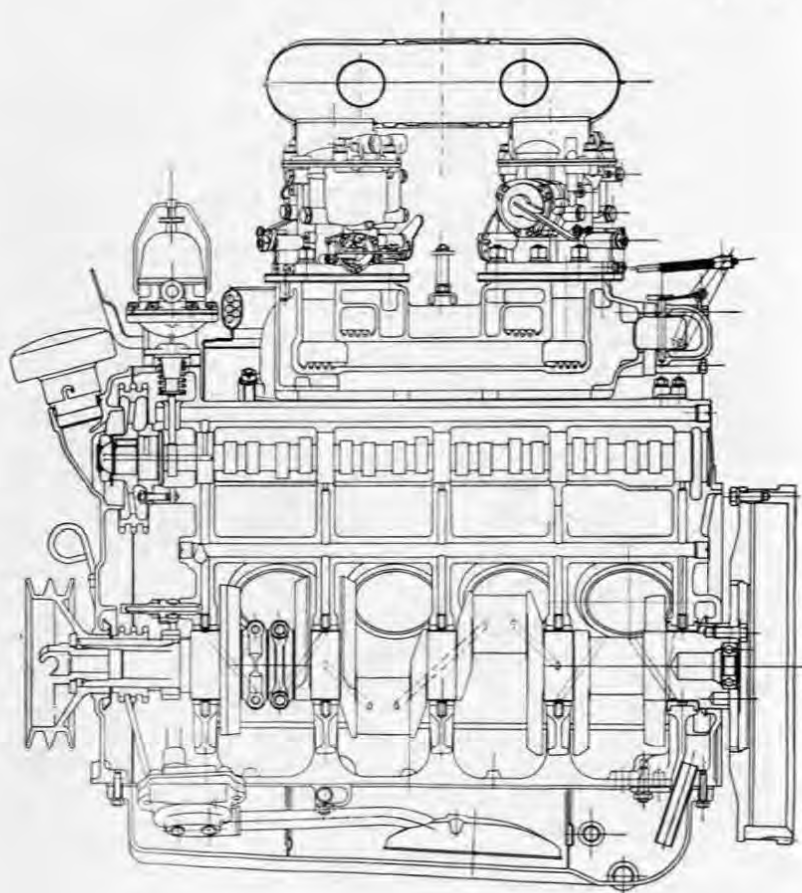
Longitudinal section of the Tatra 603 F engine.
